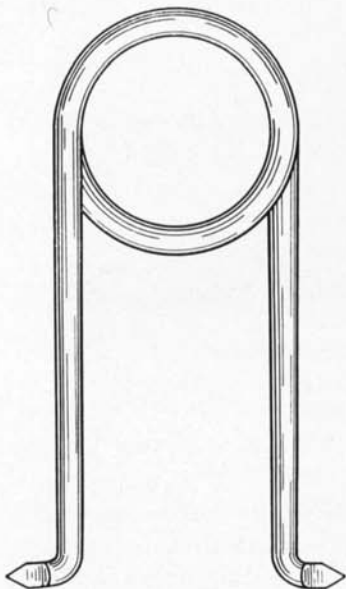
Bent wire filed on ends to a V-shape for cleaning threads in chuck-backs and face plates.
